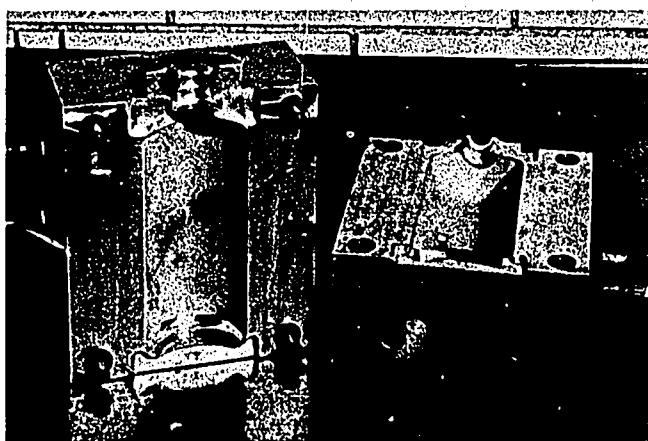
When high-speed production is needed, special tooling is often used. This blowing mold is used in the production of a plastic bottle.
